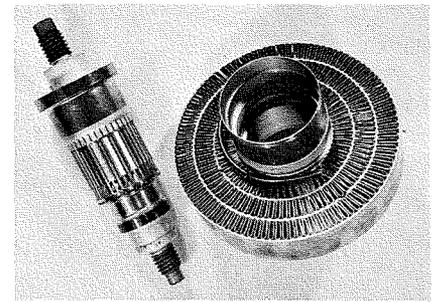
Mount assembly ready for insertion into the anode-radiator assembly.
